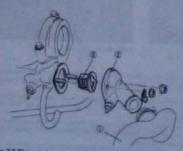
Thermostat removal - early models shown (Sec 3)
